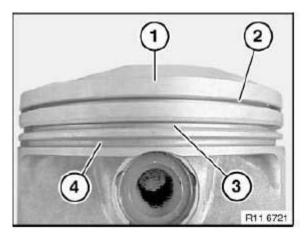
Identifying Plain Compression Ring, Stepped Ring And Bevel-Edged Oil Control Ring Groove Courtesy of BMW OF NORTH AMERICA, INC.
